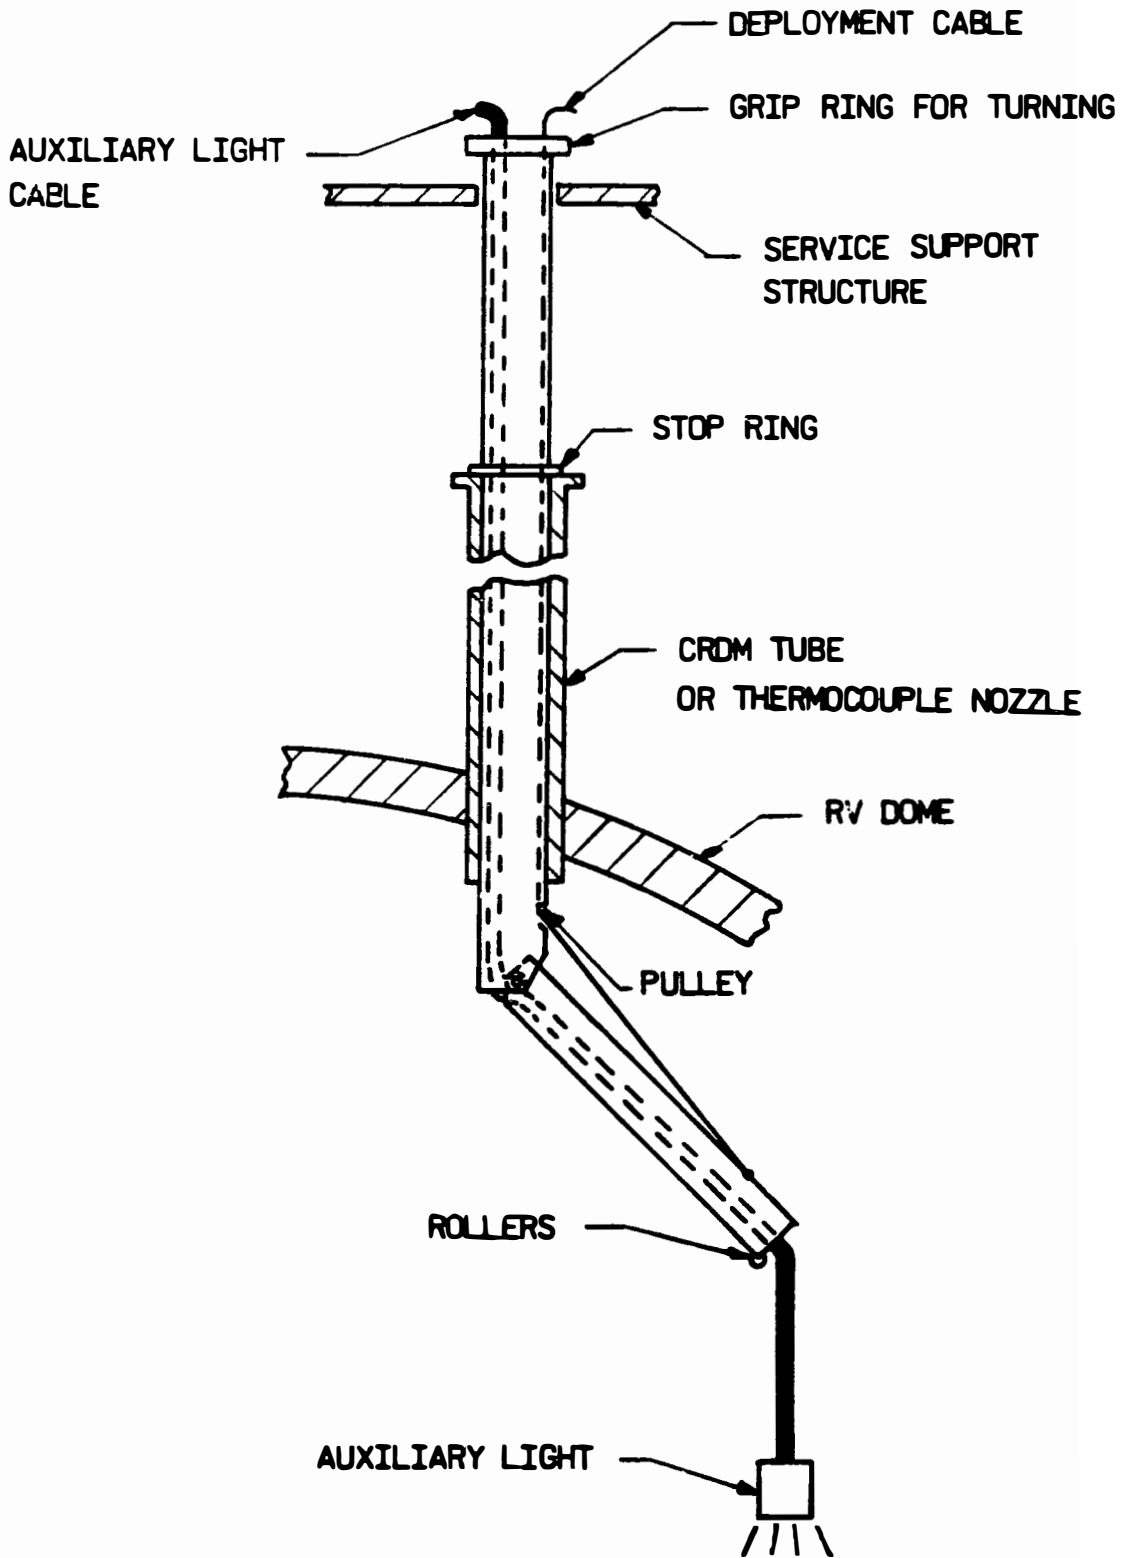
HINGED TUBE MANIPULATOR FOR AUXILIARY LIGHTS
